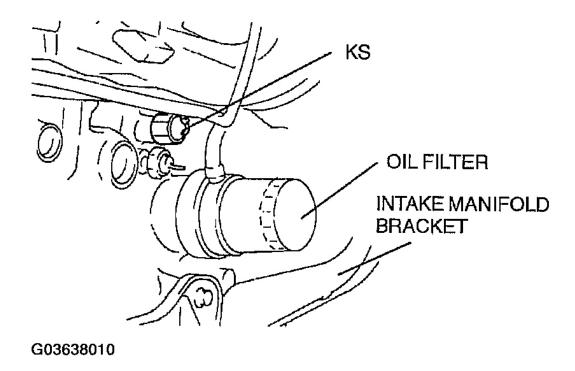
Identifying Knock Sensor Location Courtesy of MAZDA MOTORS CORP.
